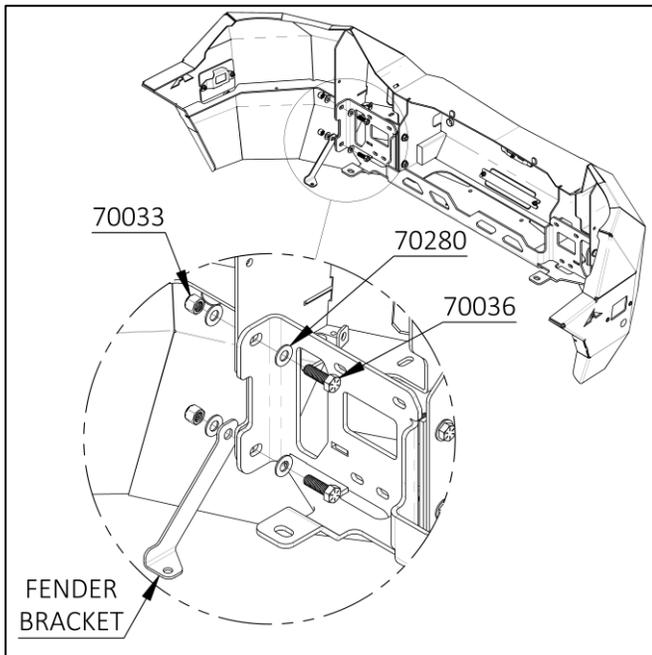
Outer Winch Cradle Install (1/2 Fasteners)
